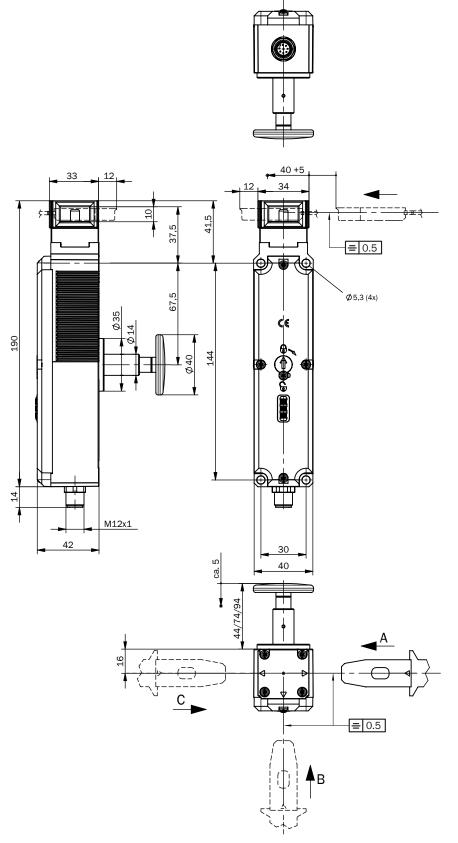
Dimensional drawing for TR110-SRUCAx0 and TR110-SLUCAx0 safety switches (mm)
